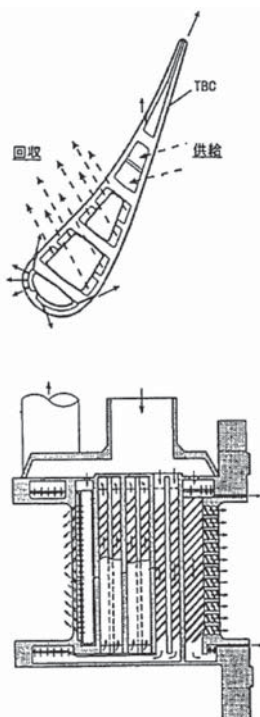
Cooling structure of the stator blades (closed steam cooling /local film cooling, Toshiba)¹²⁾
